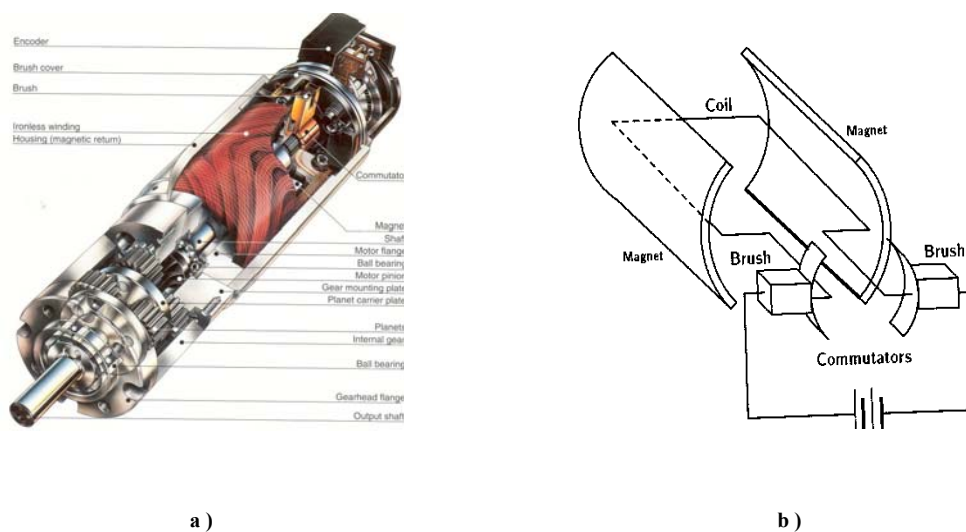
a) Inside view of a full featured brushed DC motor [23] b) Basic motor components of brushed DC motor [24]
